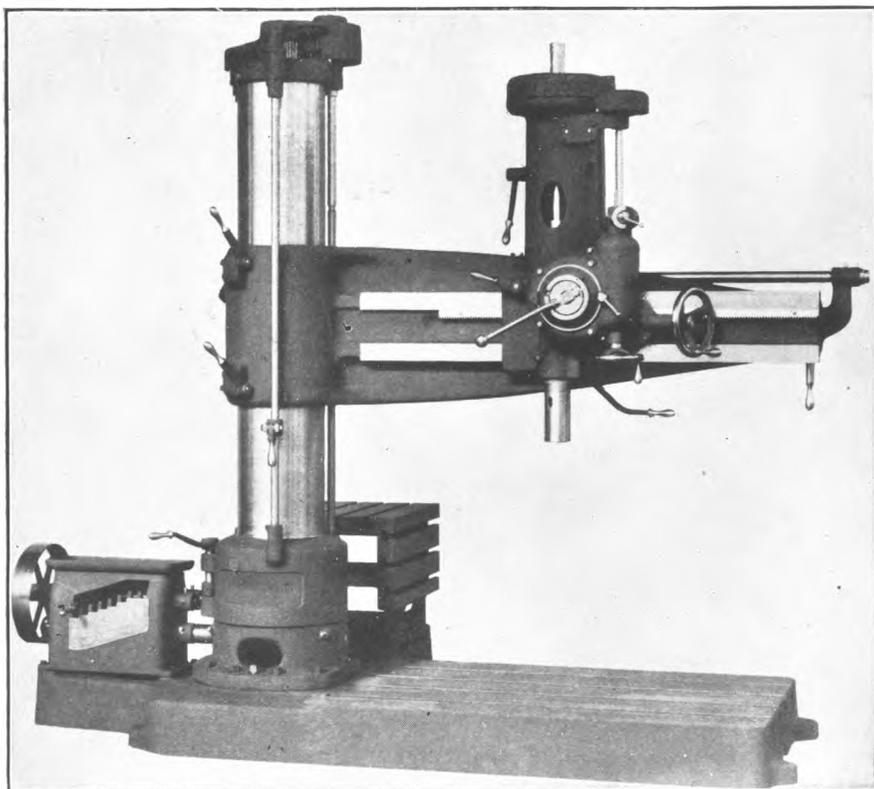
NEW TYPE OF DRILL, WITH GUARDED GEARS.
